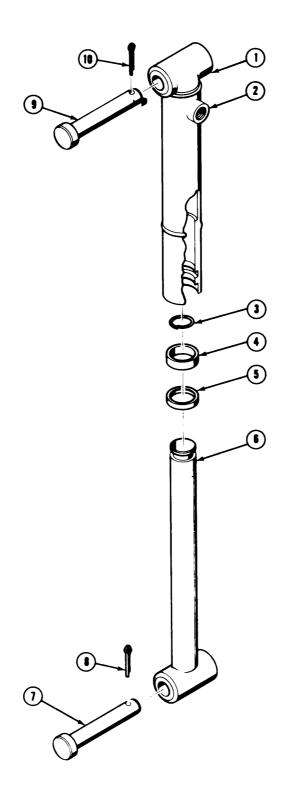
Hydraulic Lift Cylinder Exploded View
